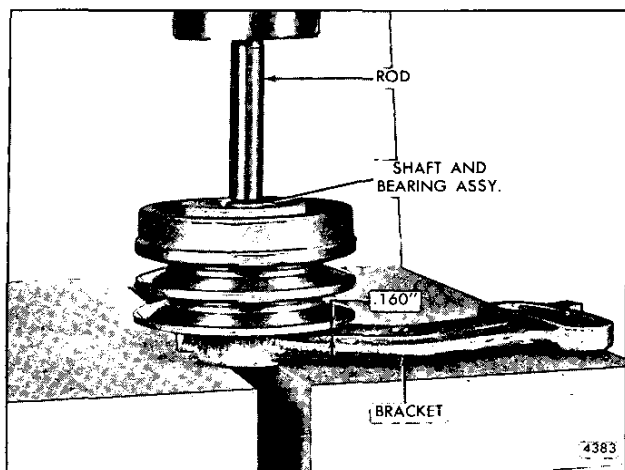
Installing Shaft and Bearing Assembly and Pulley in Bracket
